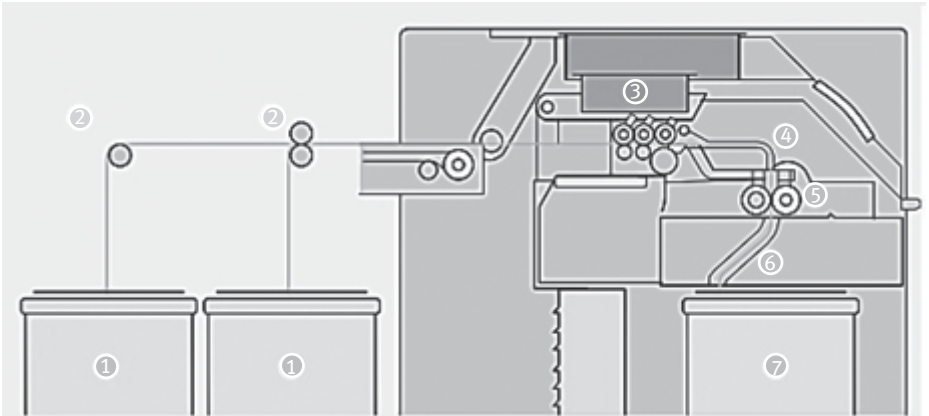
Material flow through draw frame (1) Can, (2) Feed roller pair, (3) Drafting arrangement, (4) Tube (Funnel), (5) Calendering roller, (6) Passage (Coiler tube), (7) Can.
